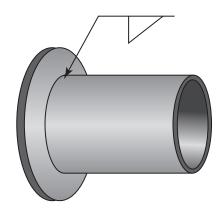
Horizontal fixed 5F fillet weld.
